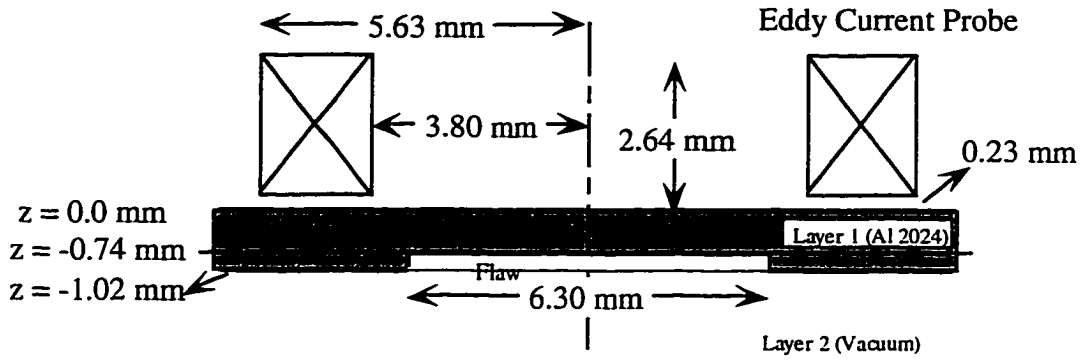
Schematic drawing of the eddy current test problem of a flat bottom hole on the bottom side of a thin aluminum plate.
